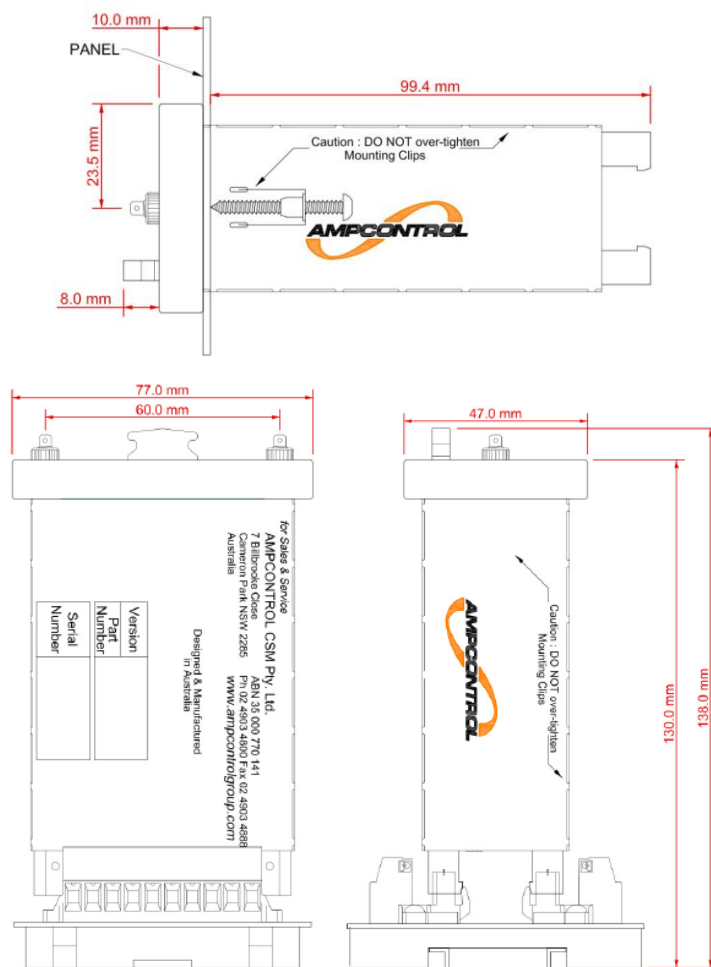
ELD enclosure dimensions – Panel mounted (top) and DIN rail mounted (bottom) options
